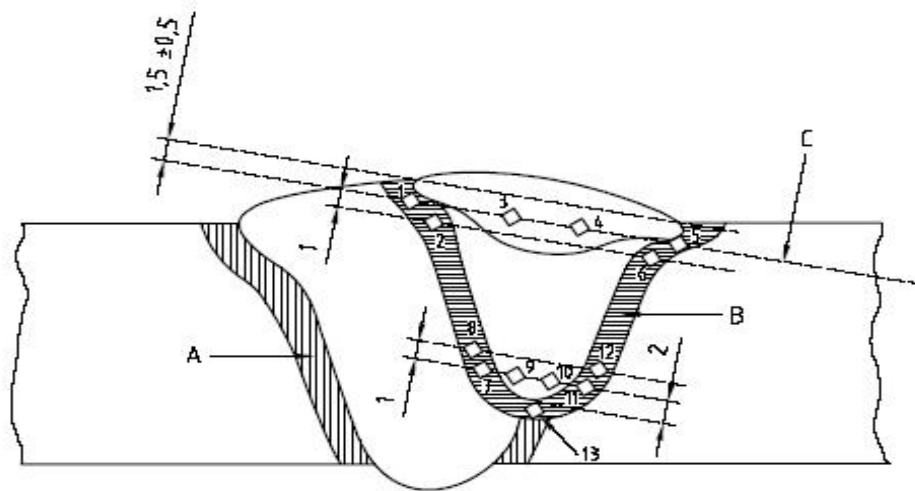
Repairing Weld and Partial Penetration Weld
